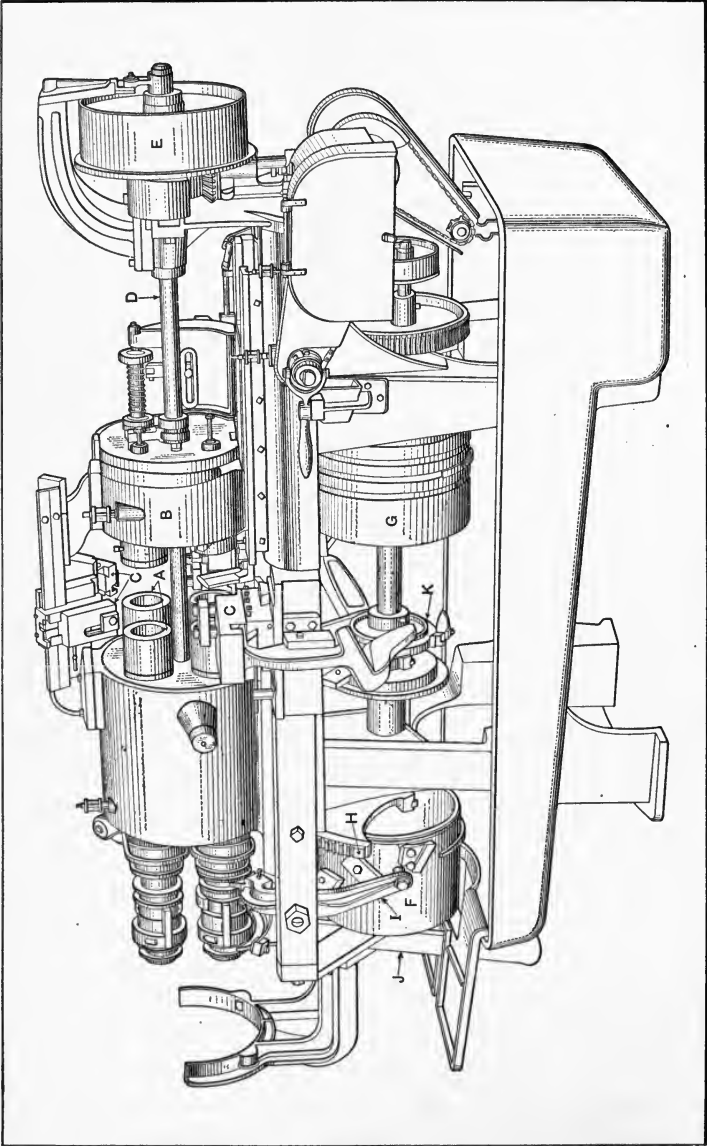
Acme Automatic Multiple-spindle Screw Machine
